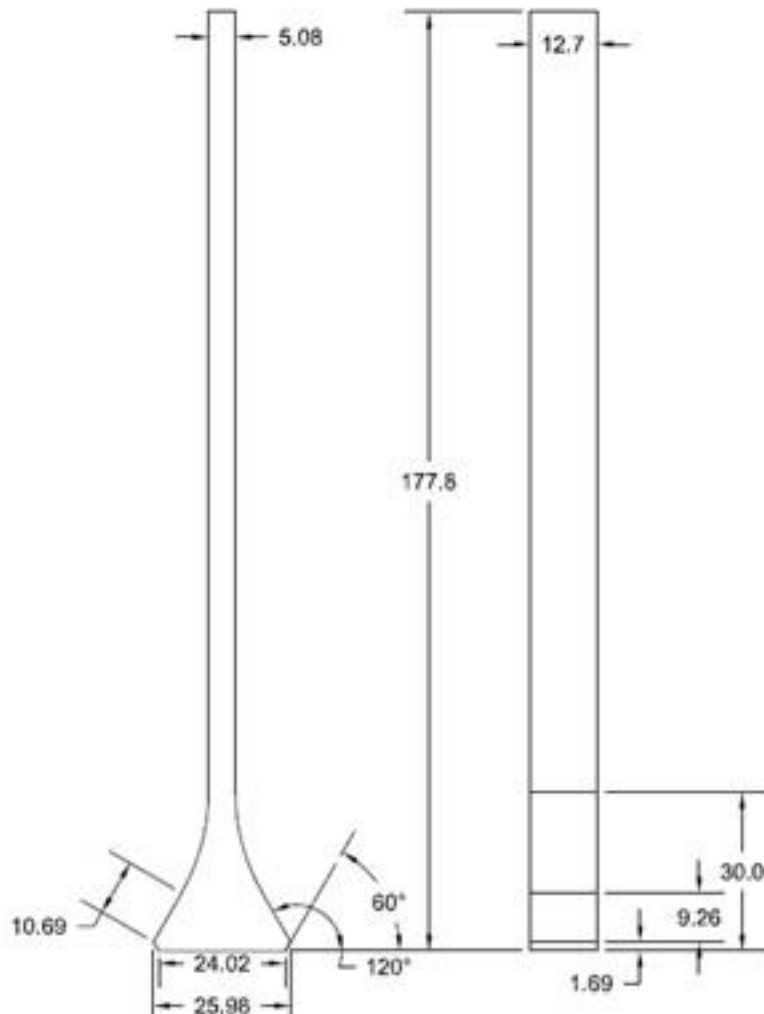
A Machining Drawing For The Subelement Test Specimen (mm)
